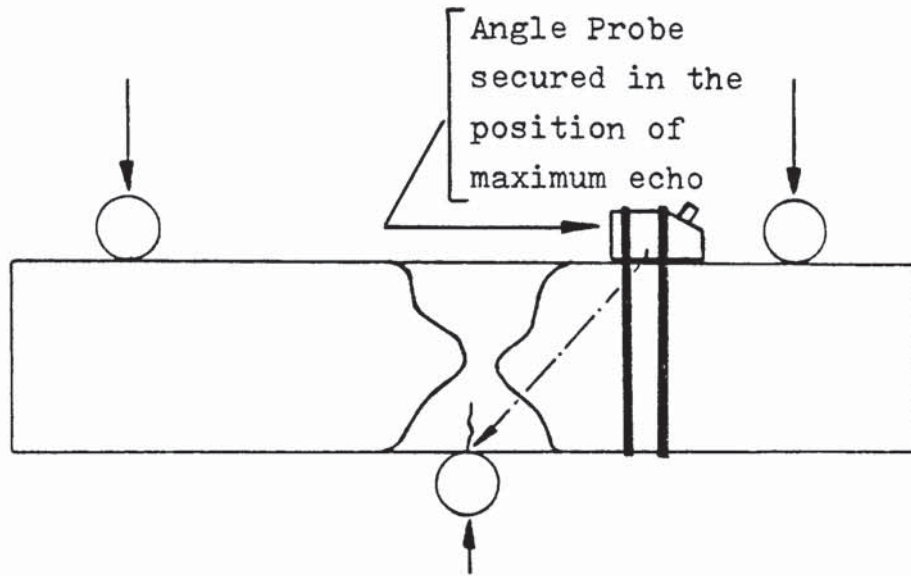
Test piece mounted on three point bending jig for angle probe scanning of cracks under compressive loading.
